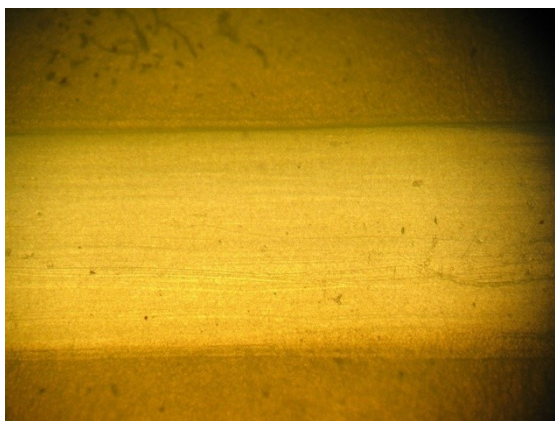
The appearance of the welding seam of list polyethylene made by the ultrasonic device with the chopper regulator
